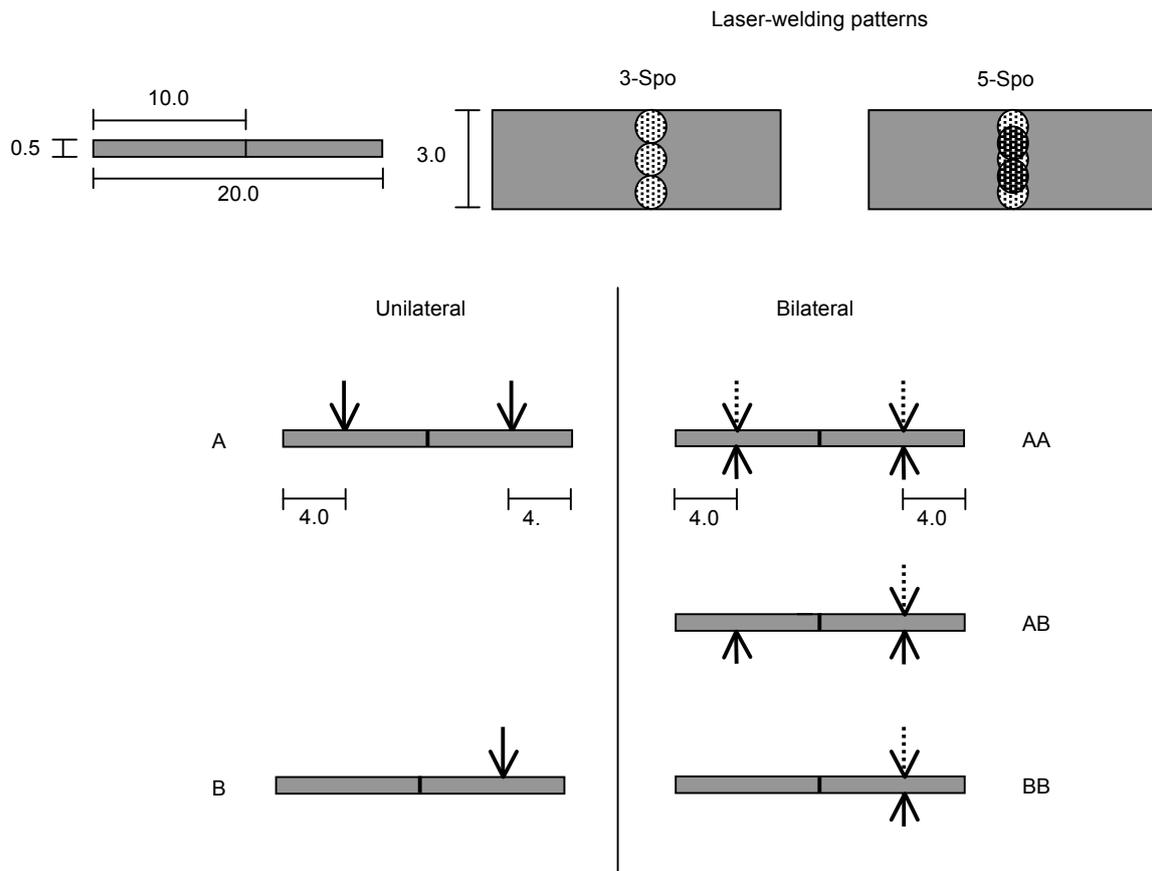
Experimental patterns for laser welding and fixing the ends of specimens (unit: mm).
